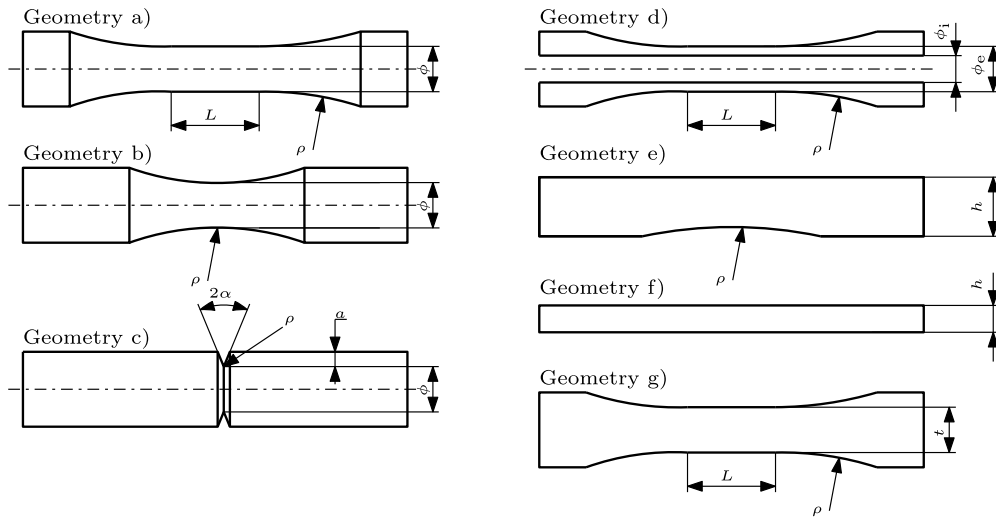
Geometry of the specimens analyzed in Figs. 25 and 26 and Tables 2,3; a) specimen with tangentially blending fillets between the test section and the grip section and circular cross-section; b) specimen with a continuous radius between the grip section and circular cross-section; c) sharply V-notched cylindrical specimens; d) specimen with tangentially blending fillets between the test section and the grip section and tubular cross-section; e) beams with blunt notch subjected to 4 point bending and rectangular cross-section; f) beams subjected to 4 point bending; g) specimen with a continuous radius between the grip section and rectangular cross-section.
